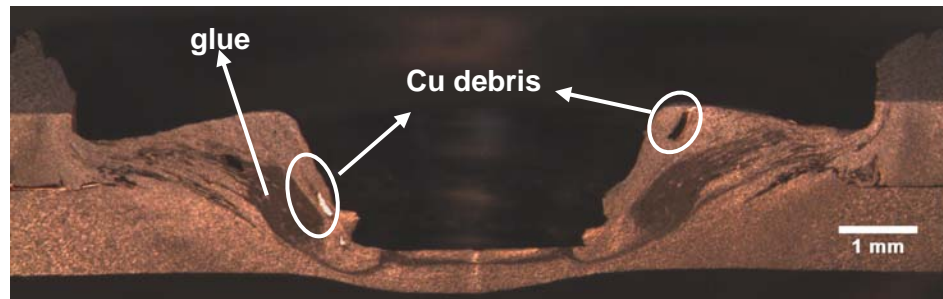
Optical macrograph of cross section of AA6016/Cu strip spot welding.
